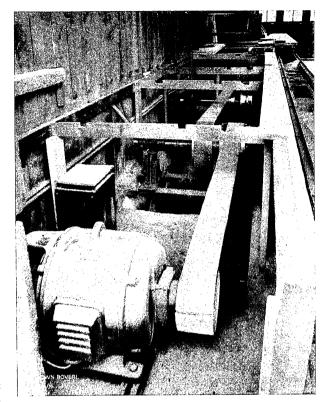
Circular saw for log trimming layout with drive by an 11-kW motor.
